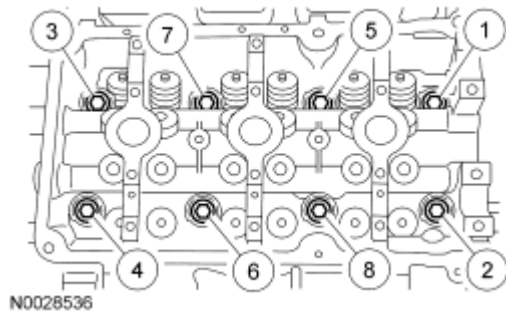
Identifying Removing Sequence Of Cylinder Head Bolts
